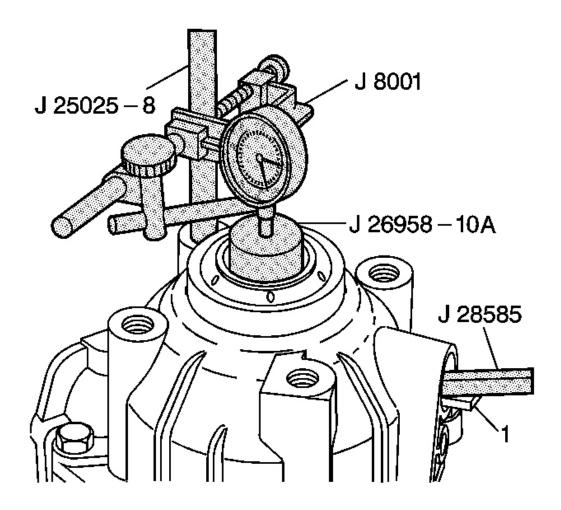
Installing J 25025-8, J 26958-10A & J 8001 To Transmission Case Courtesy of GENERAL MOTORS CORP.
